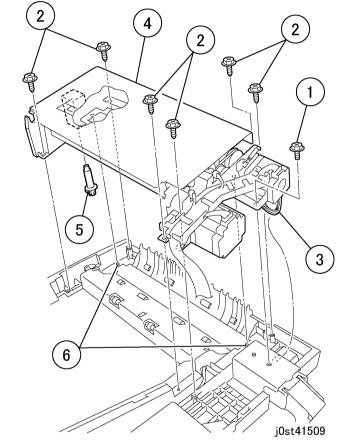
Removing the DADF Feeder Assembly (j0st41509)
